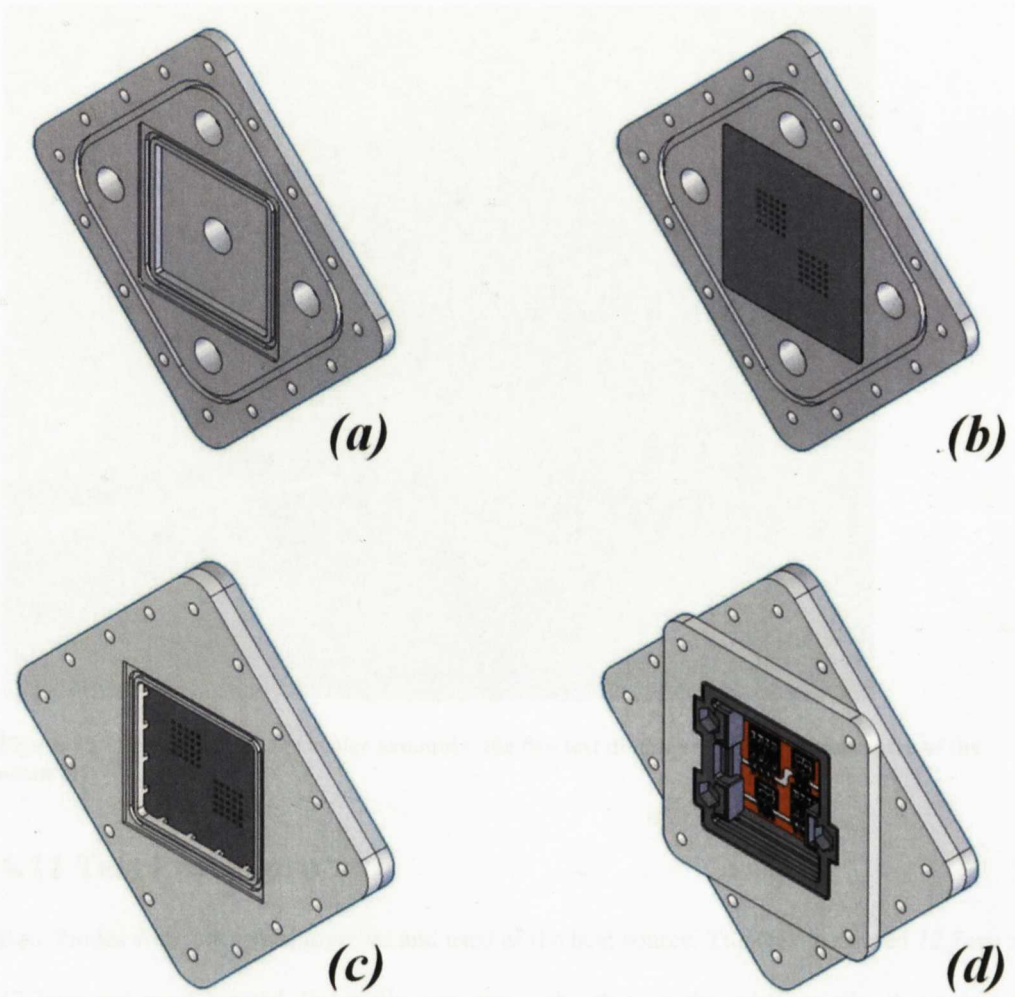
CAD drawings detailing the assembly of the test apparatus:
